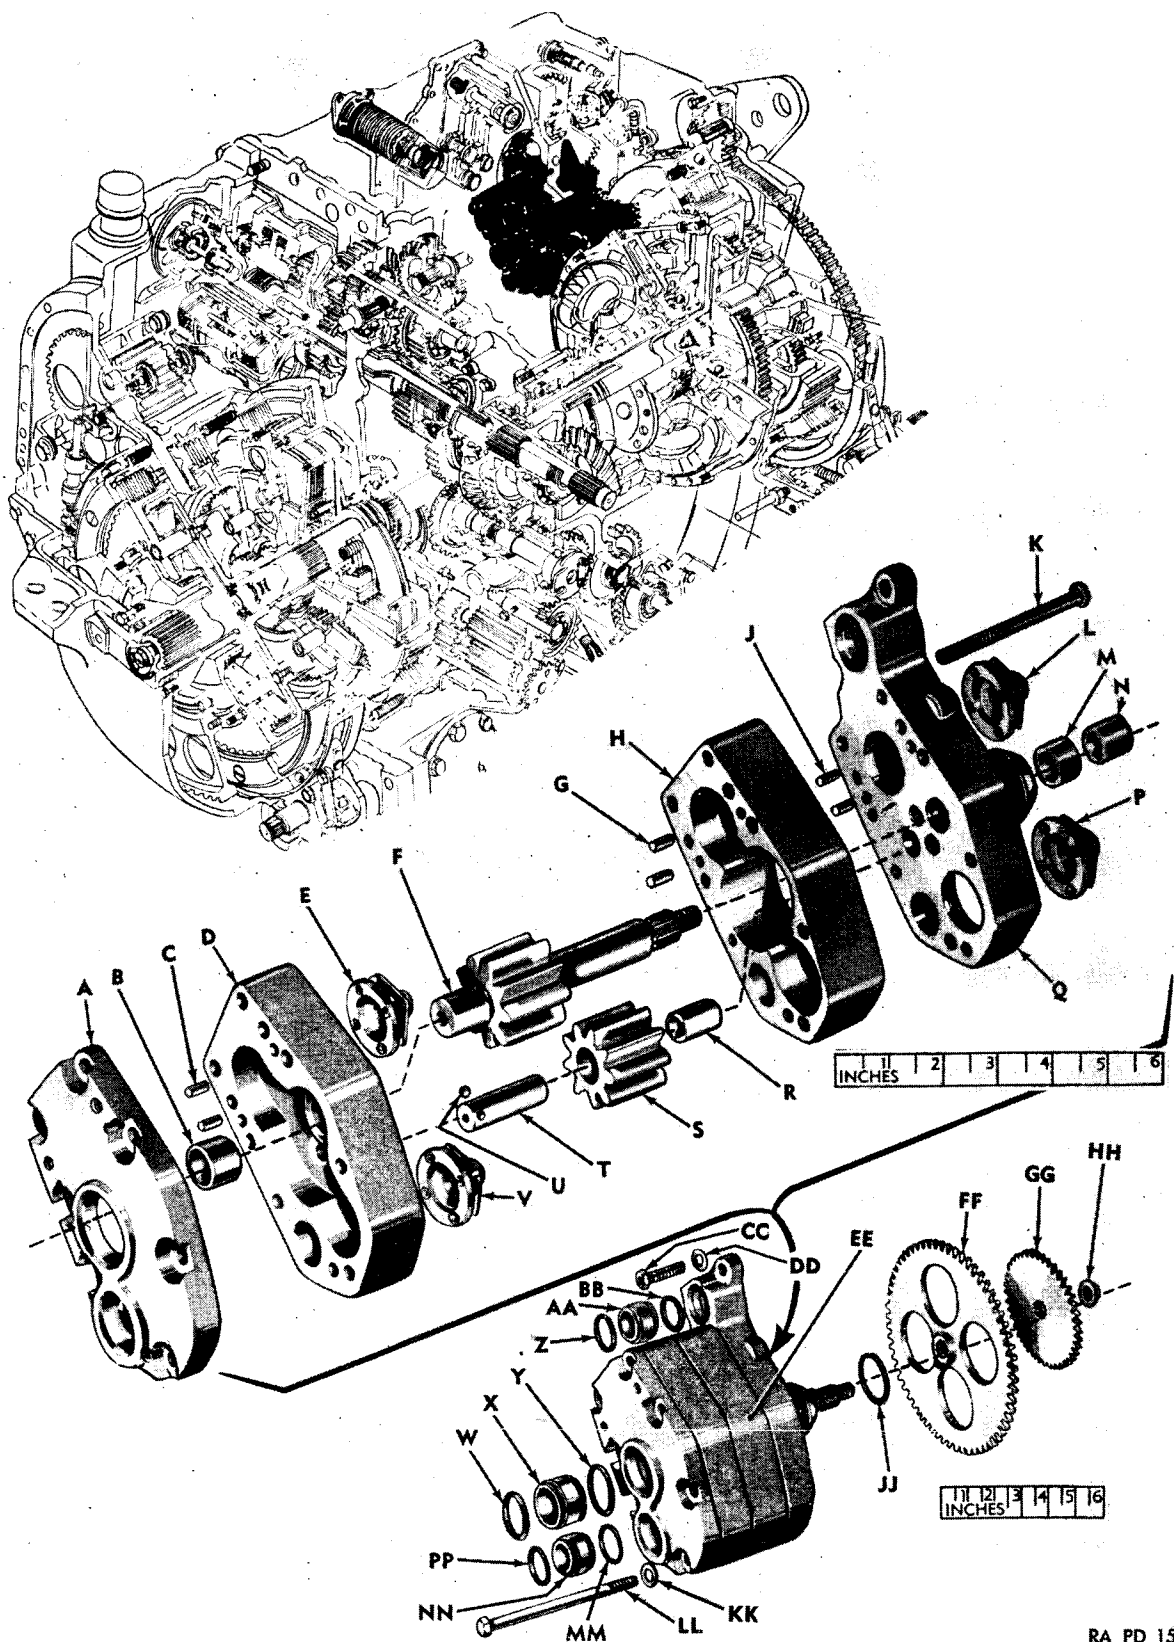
Output-brake and pressure-pump assembly—exploded view.
